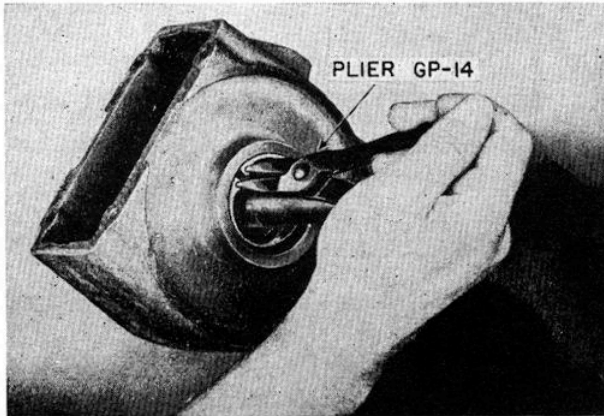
REMOVING TILLER DRIVE SHAFT BEARING-RETAINER SNAP RING
